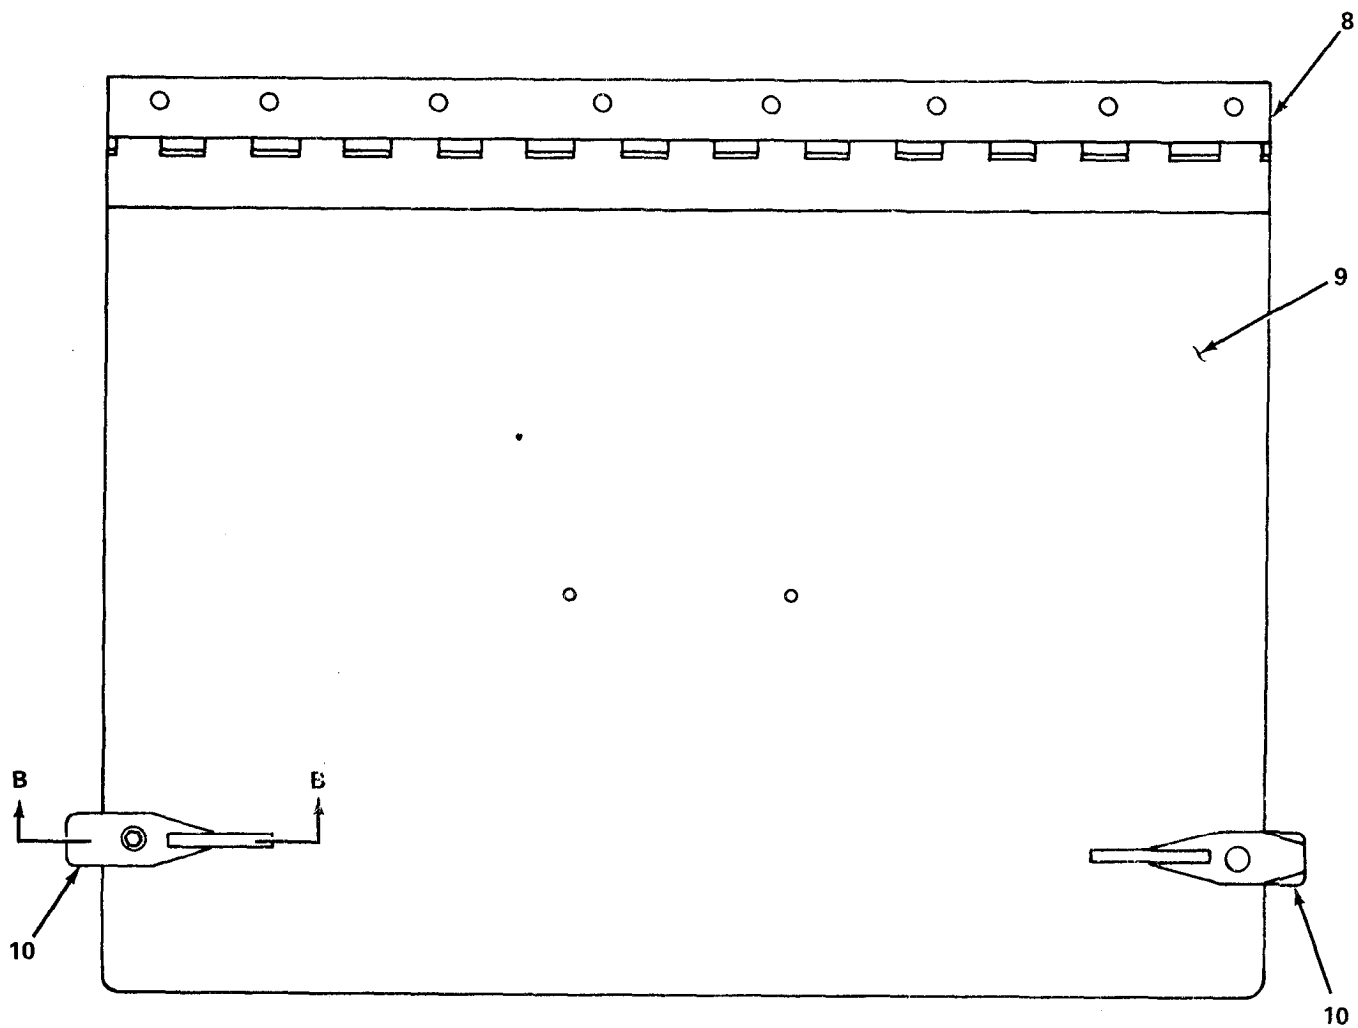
Power Entrance Box Cover Assembly (Sheet 2 of 4)
